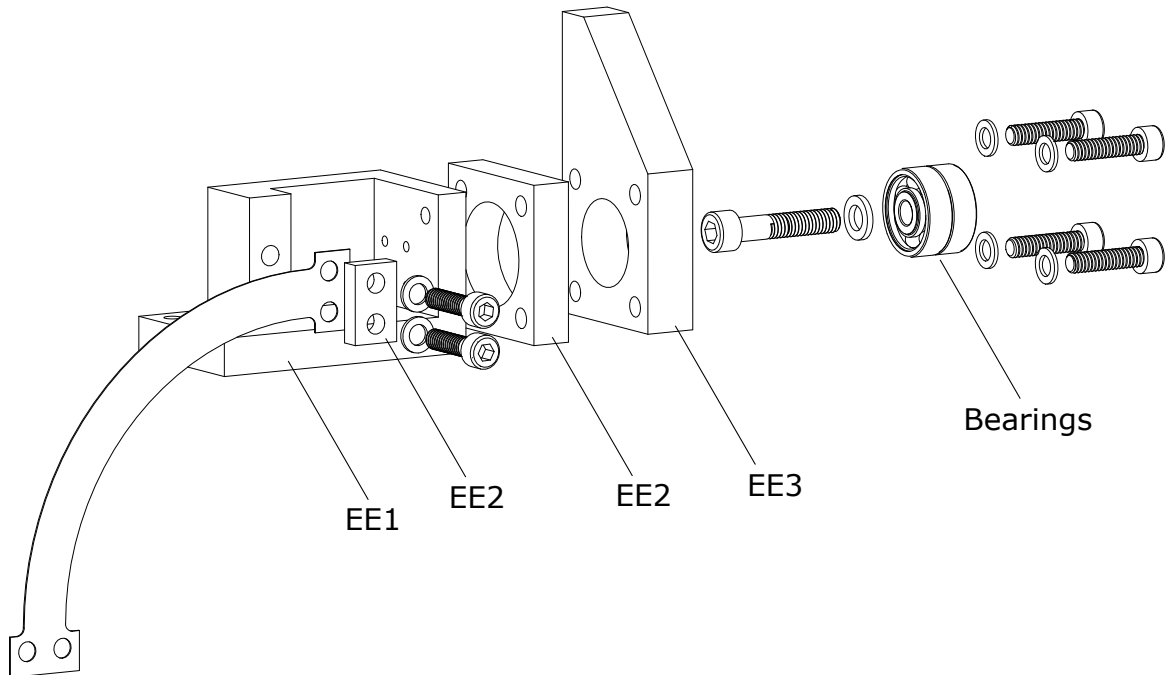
The assembly of the EE and a rotary bearing, for a measurement of the rotational stiffness around  $z$  for a single flexure.
